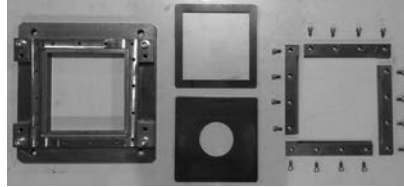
SPIF-A's 230×230mm blank holder components.
